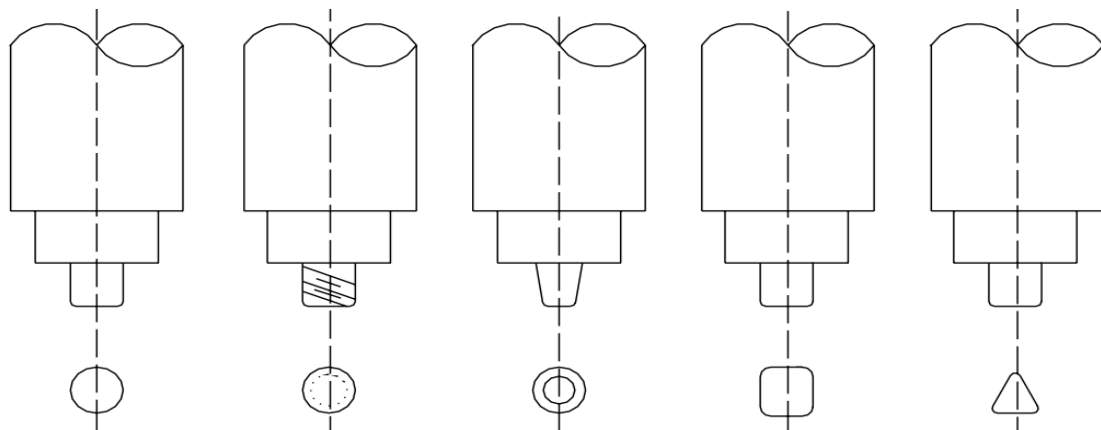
CFSW pin tool (a) Straight cylinder (b) Threaded cylinder (c) Tapered cylinder (d) Square (e) Triangle [3]
